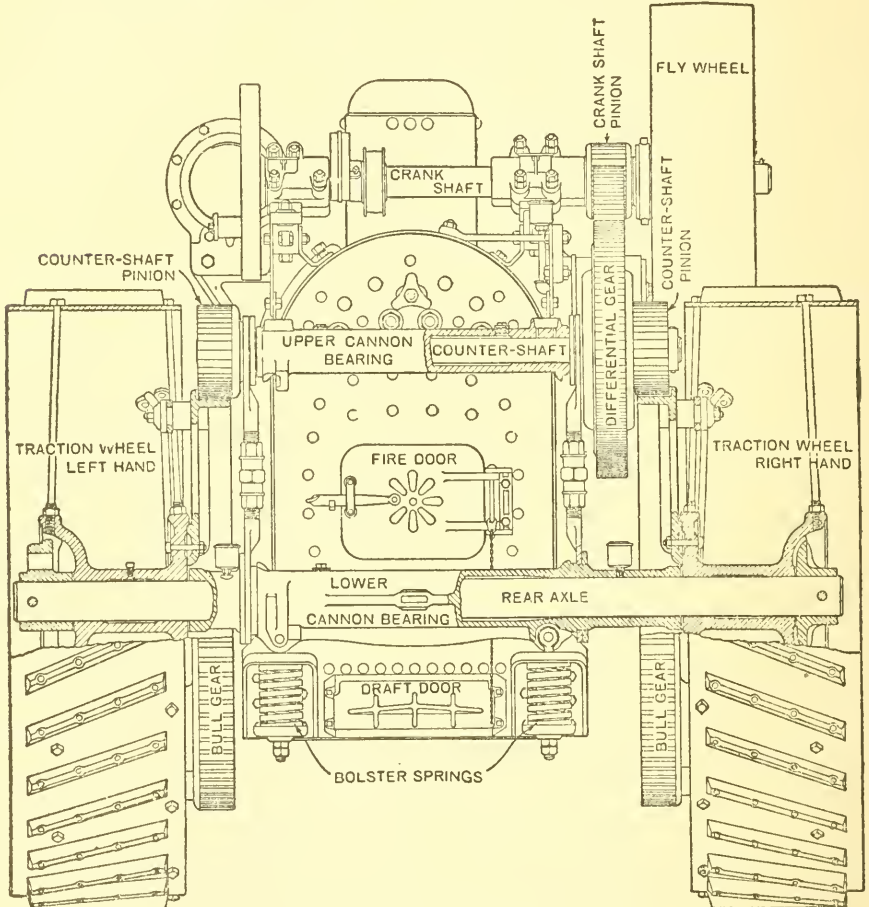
CUT SHOWING CANNON BEARINGS AND GEARING.
